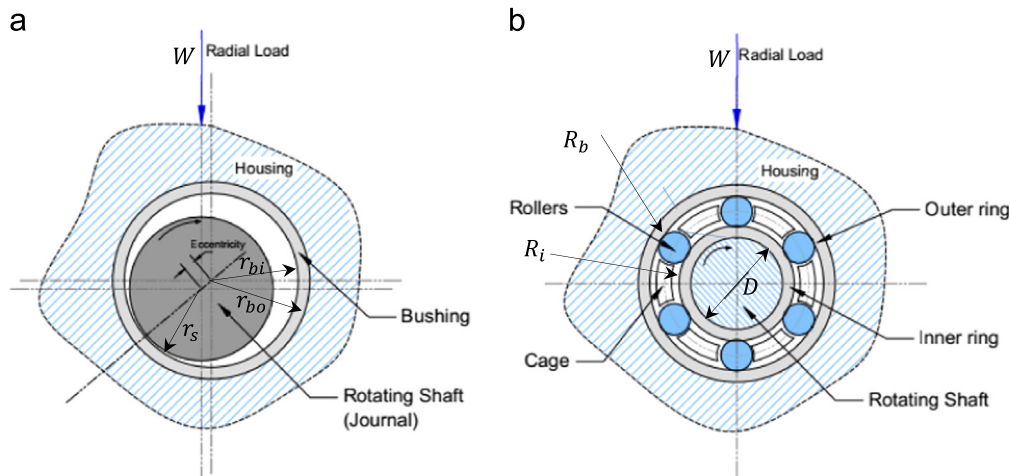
Schematic of (a) journal bearings (b) rolling element bearings under a radial load.
